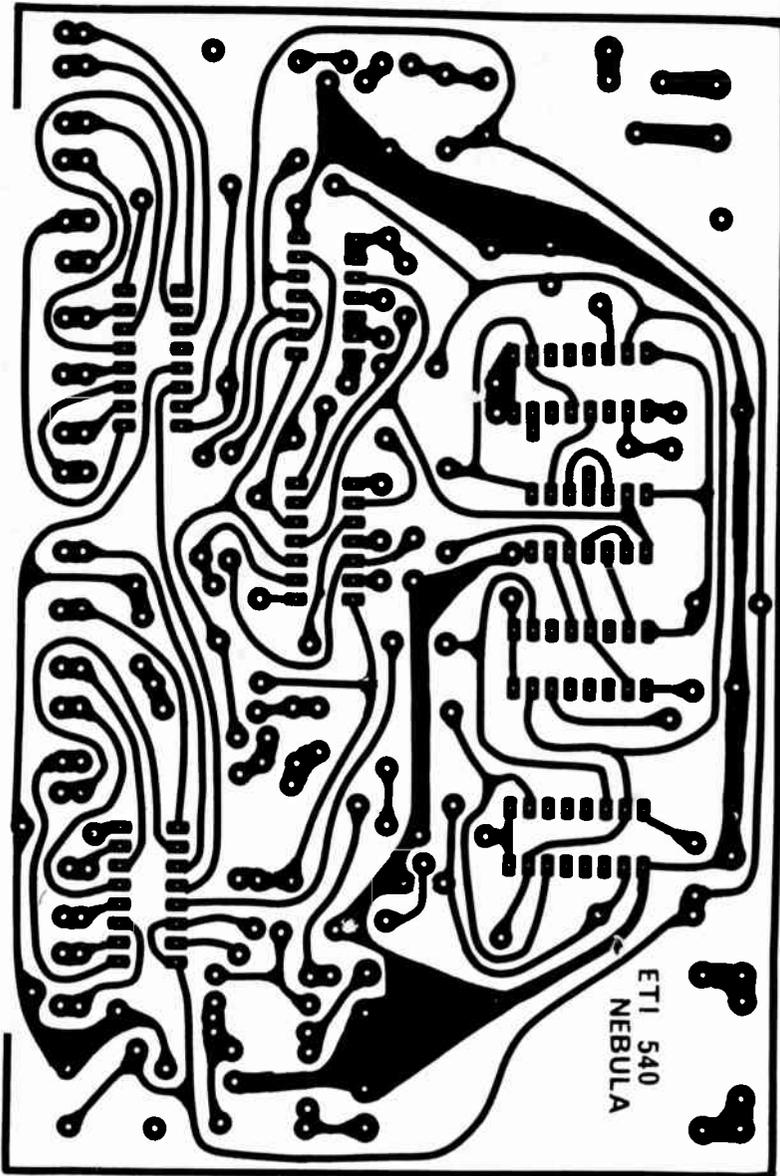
Printed-Circuit board layout for the timer. Full size 153 x 100 mm.
